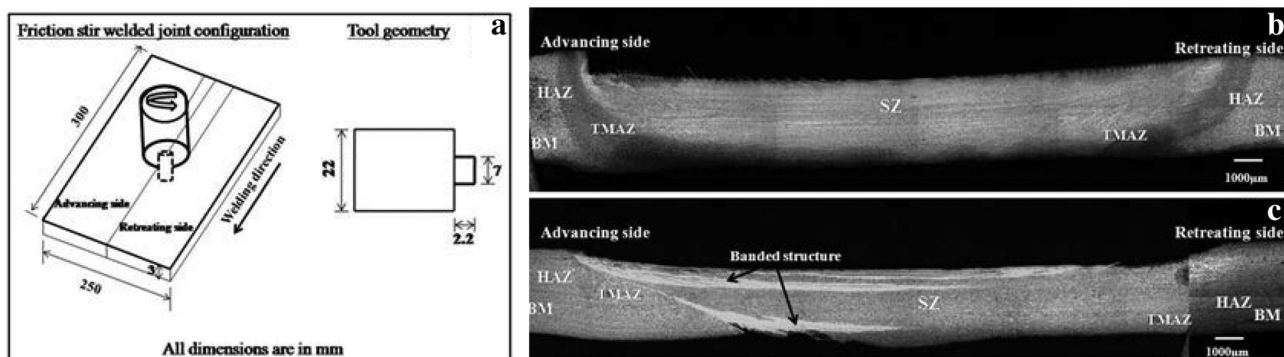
a FSW joint configuration and tool geometry. b Optical low-magnification view of friction-stir-welded P9 steel specimen with 200 rpm and c 500 rpm
